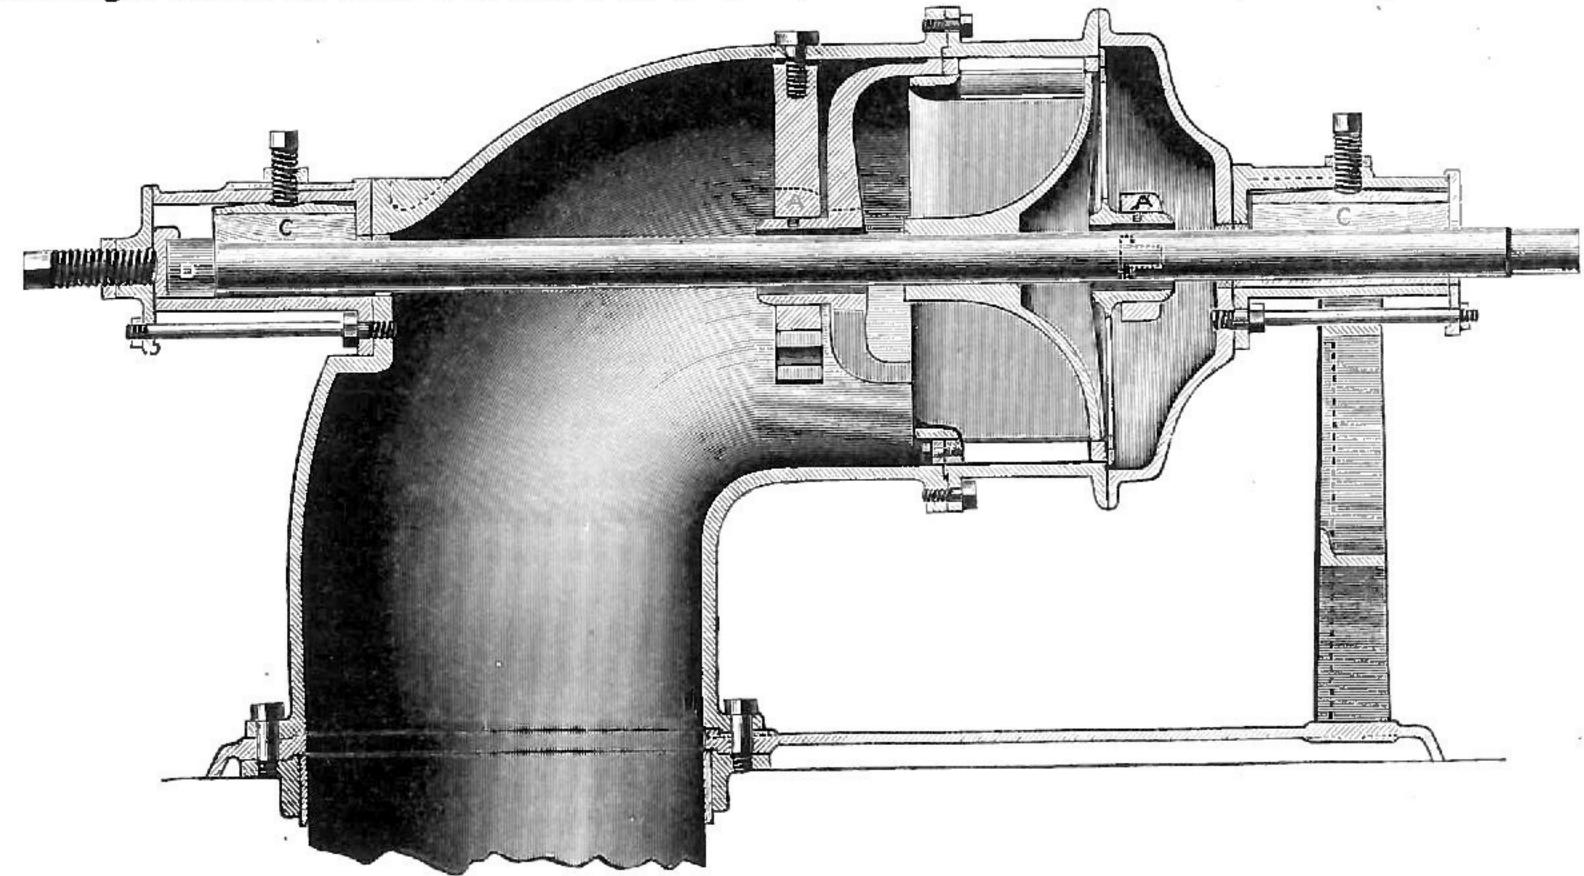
LONGITUDINAL SECTION OF THE "STANDARD" TURBINE
